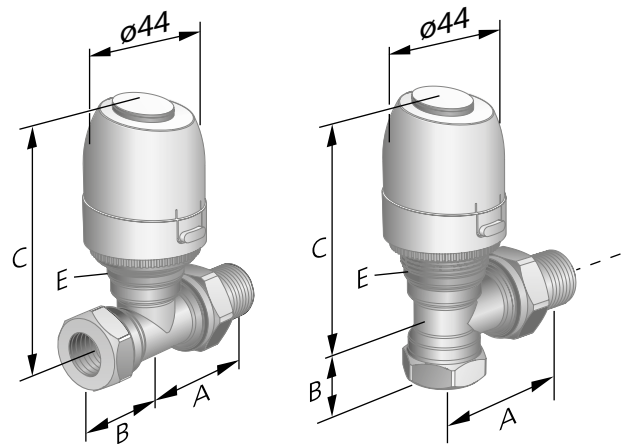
VALVE-S valve and VALVE-A respectively with ACTUATOR valve actuator mounted. E = M30 x 1.5 mm threaded mount
